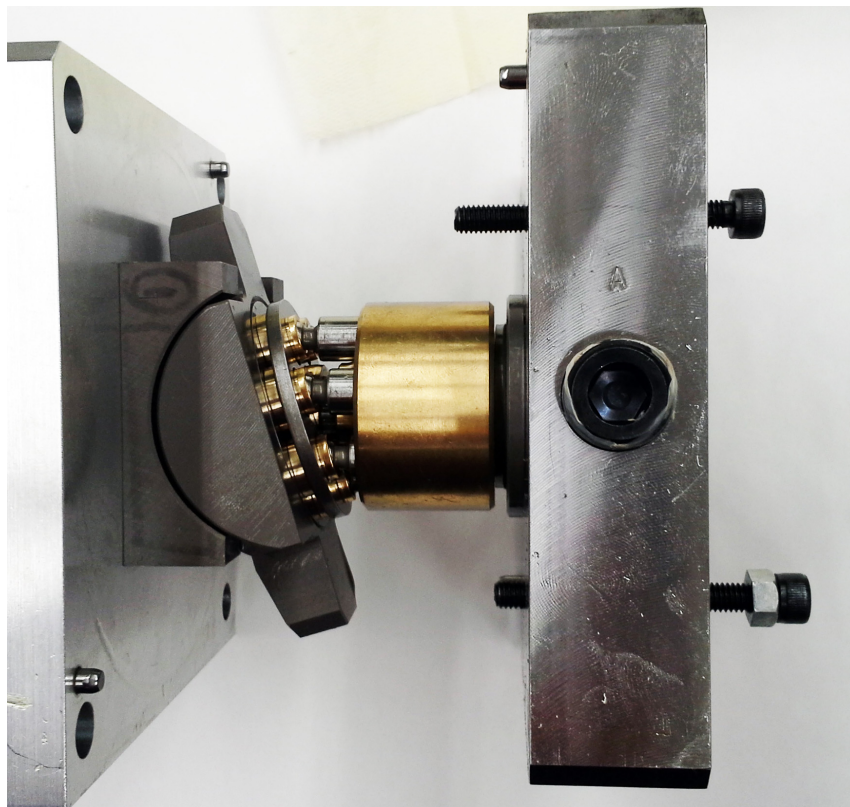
Actual prototype disassembled to show the swashplate, piston barrel, valve plate, the port block, and two manual adjustment screws that were replaced by a stepper motor and hydraulic piston
